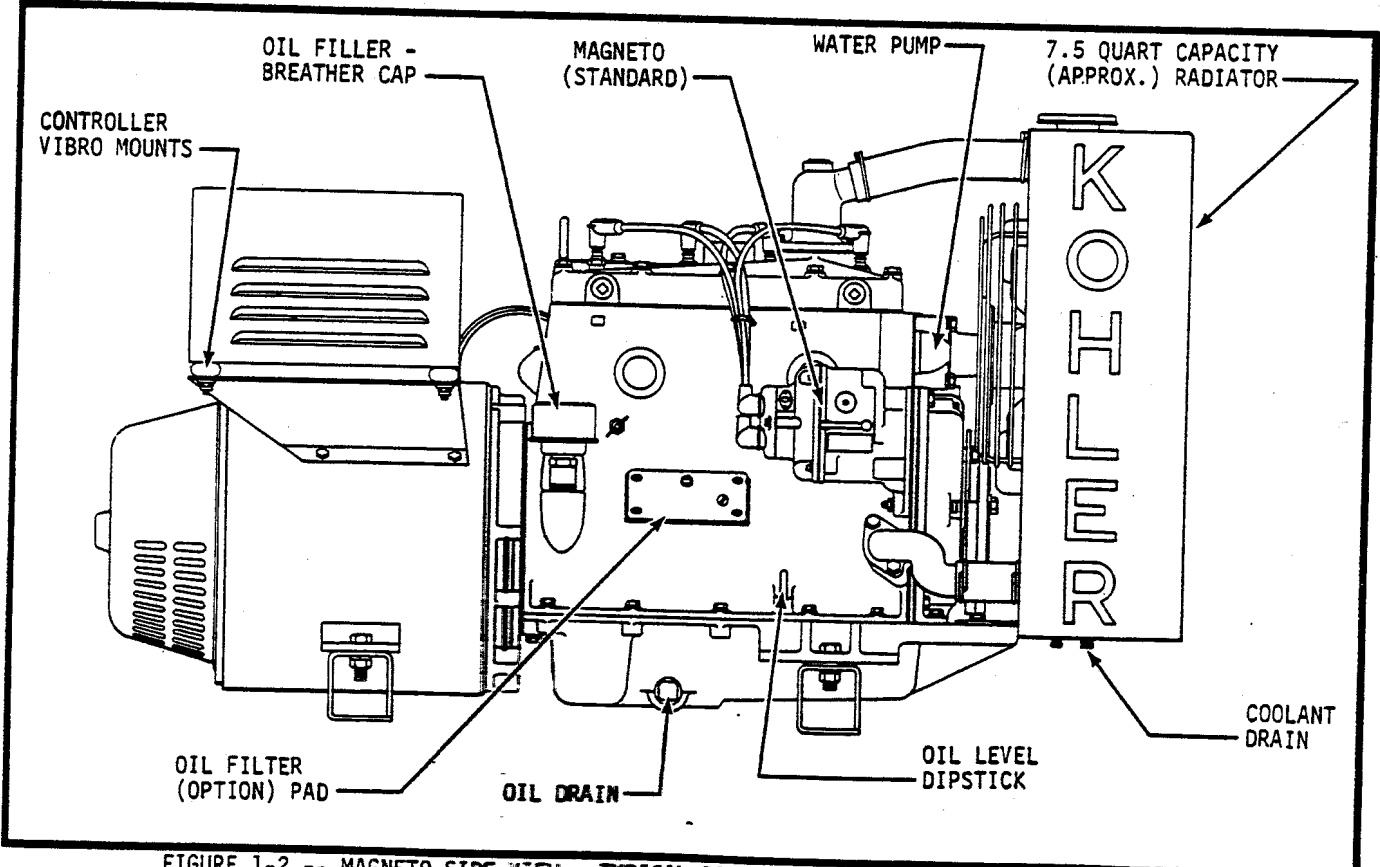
MAGNETO SIDE VIEW - TYPICAL RADIATOR COOLED PLANT WITH L654 ENGINE
